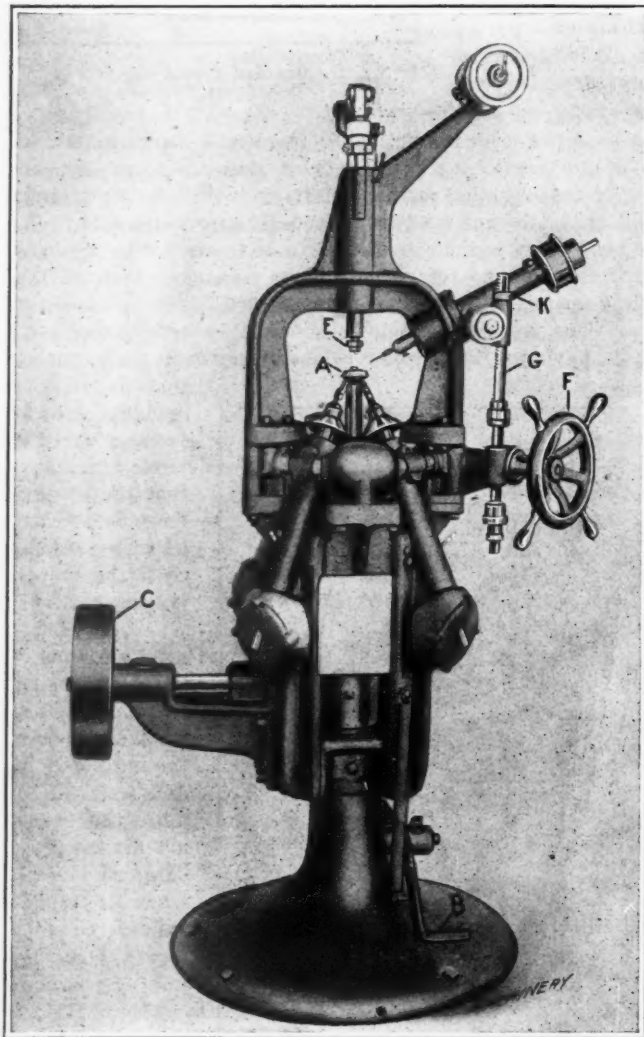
Special Five-spindle High-speed Drilling Machine for Shrapnel Fuse Closing Cap
